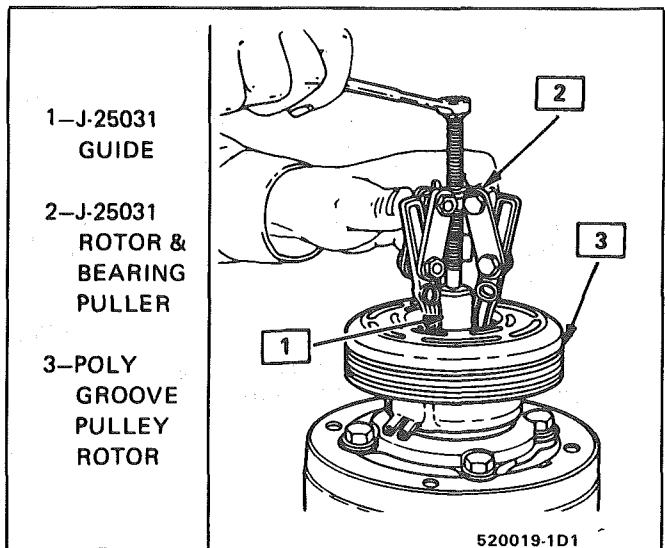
Removing Clutch Rotor Asm. - Poly-Groove Drive
